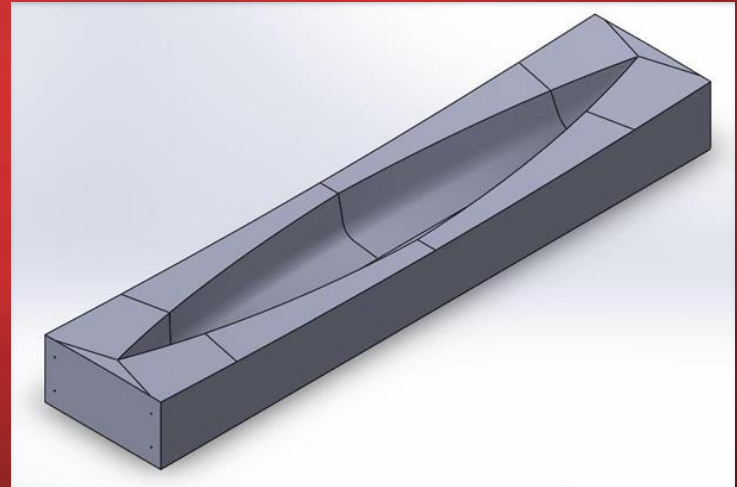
SolidWorks 2018 VolCanoe Mold design drawing
